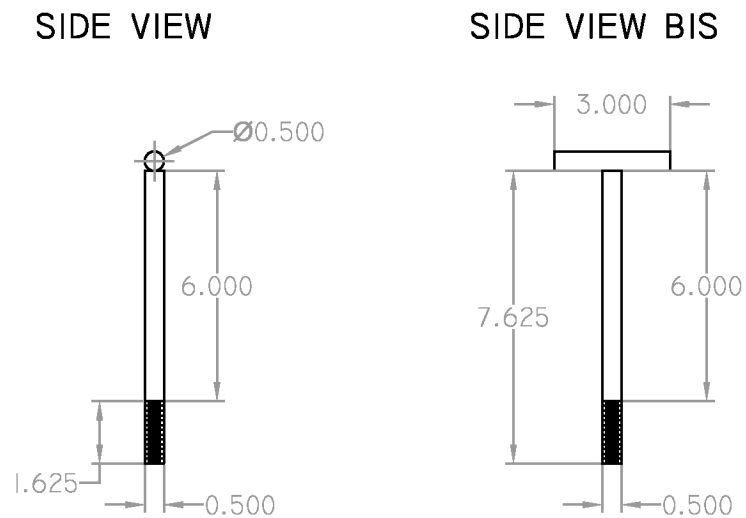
(continued) Blueprints of the parts used to build the second version of the heat flow measurement device with multiple holes: (b) upper wall, (c) handle. Dimensions are in inches.
